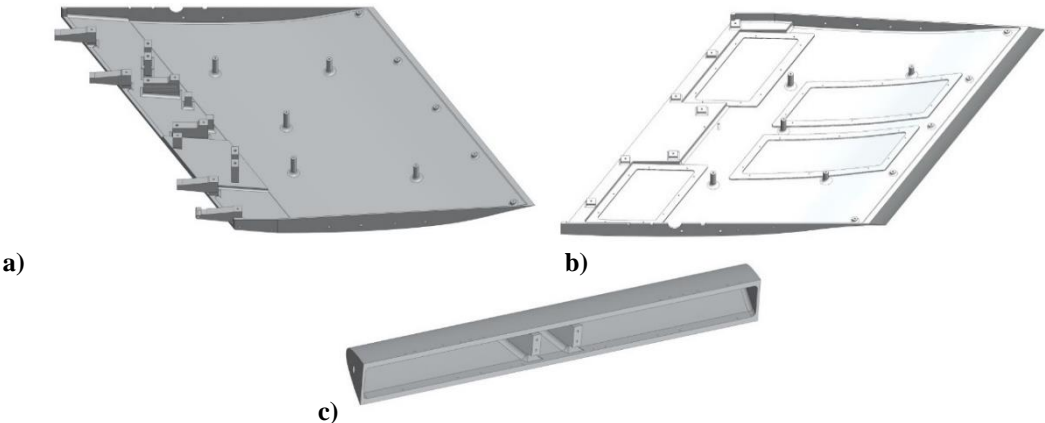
Internal structure of SWIFTER, a) test side part, b) non-test side part, c) leading-edge part
